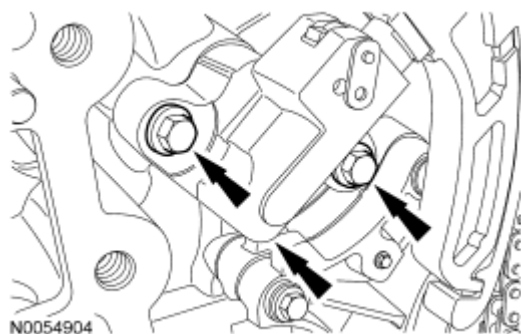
Locating Primary Timing Chain Tensioner Bolts
